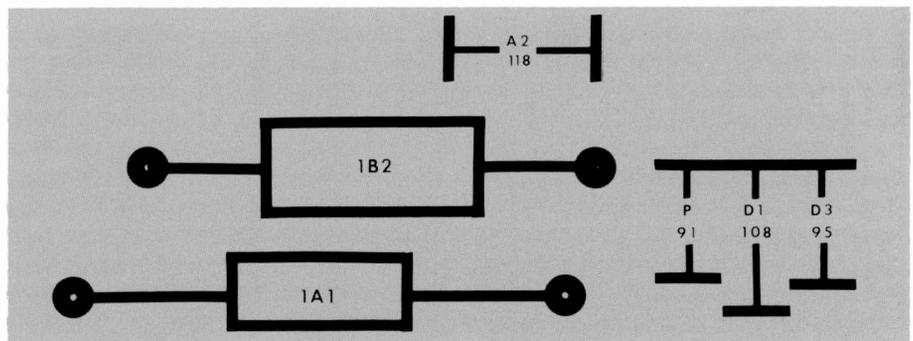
Clearances are shown for the parts described in the example. The placement satisfies the P dimension (91 mils) but violates the D1 dimension (108 mils).
